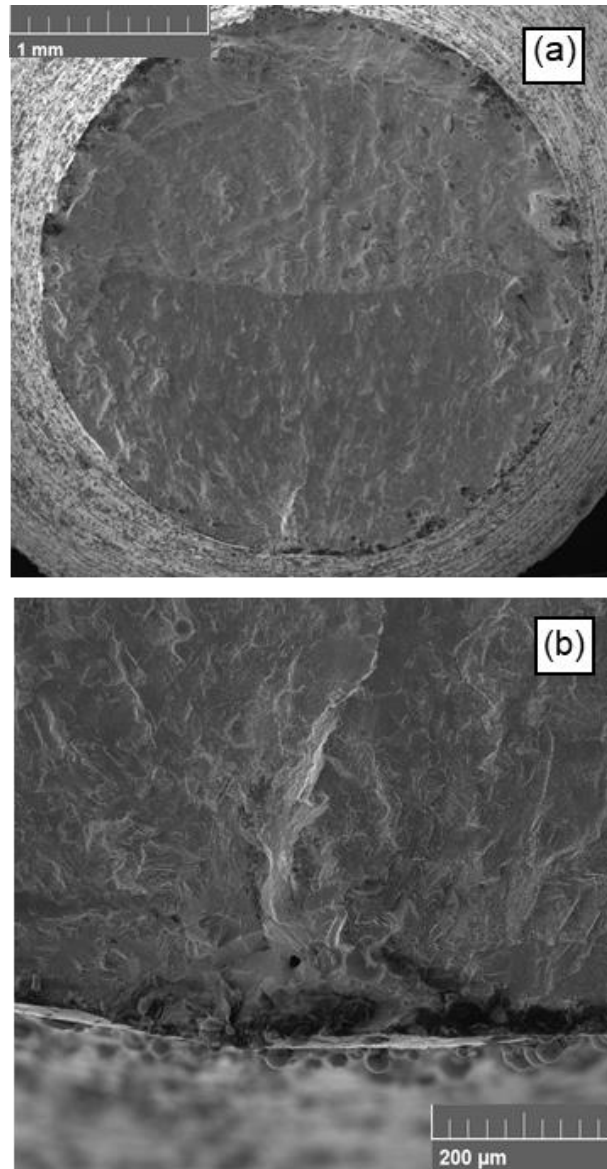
SE fracture of as-built V specimen tested at $\sigma_a = 200$ MPa with $2N_f = 1.4 \times 10^8$ reversals. The overall fracture surface is shown in (a) and the magnified crack initiation site is shown in (b).
